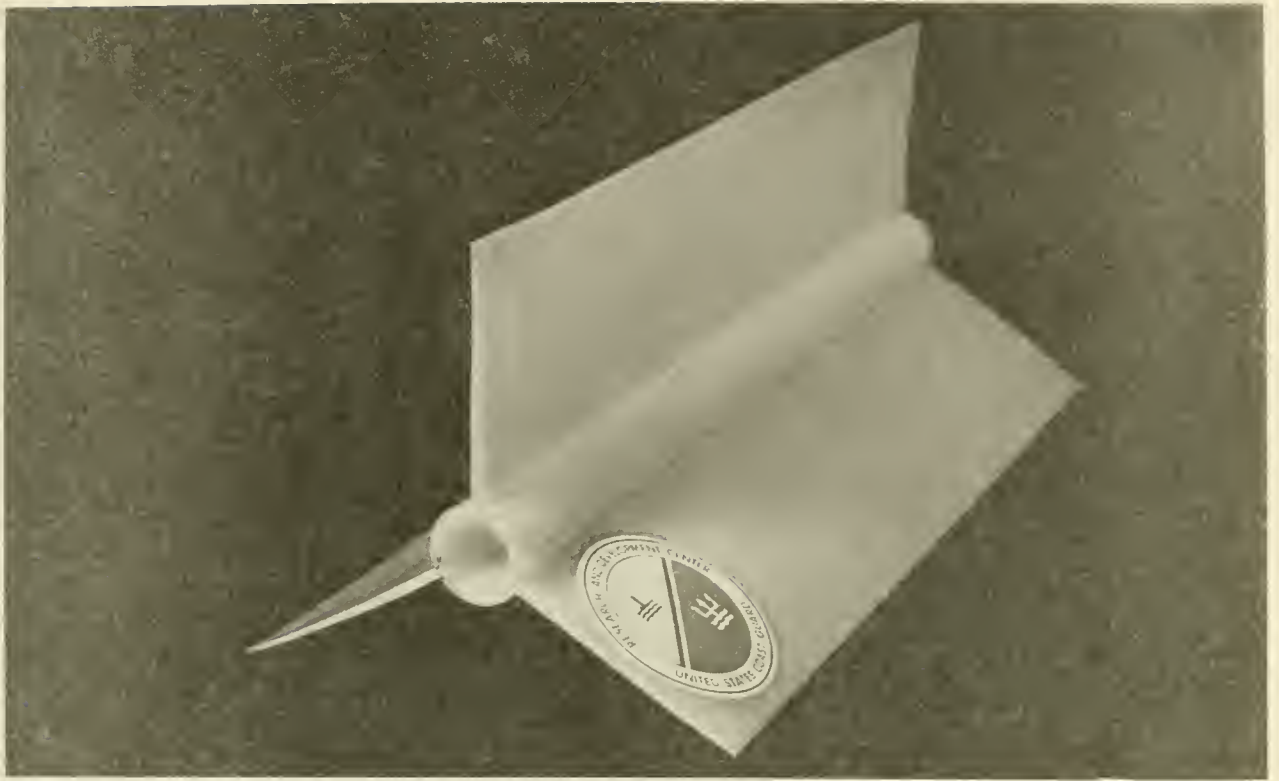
The Four Piece Extruded Iceberg—Tethering Dart Tail Assembly.
